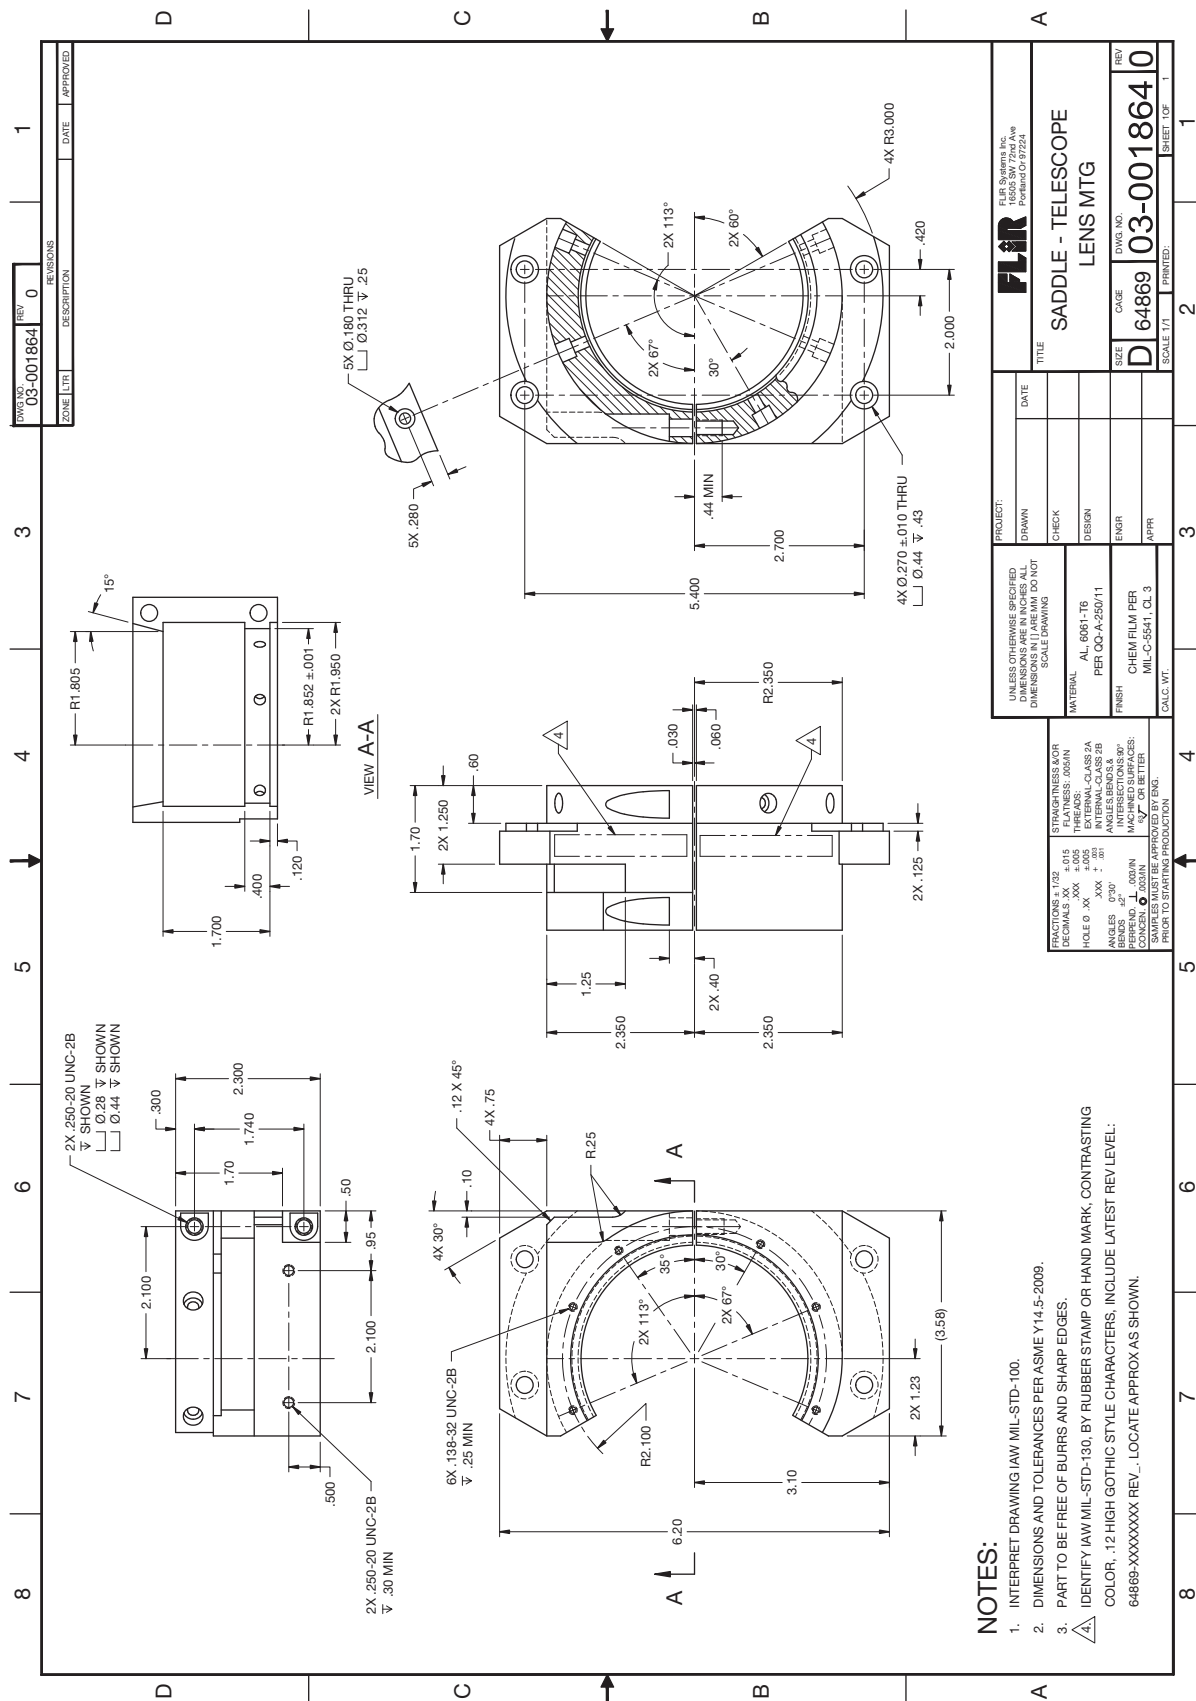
A complex part displayed on the drawing using several carefully selected views including a front, top, and right-side view; a view created from a viewing plane; a sectional view; and an auxiliary view. *Courtesy FLIR Systems
